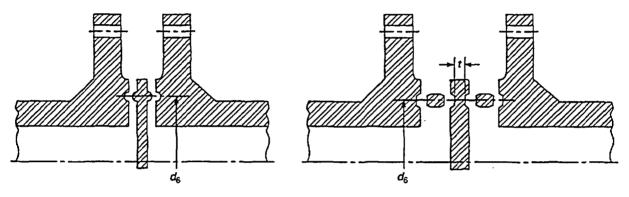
TYPES OF PERMANENT BLANKS
